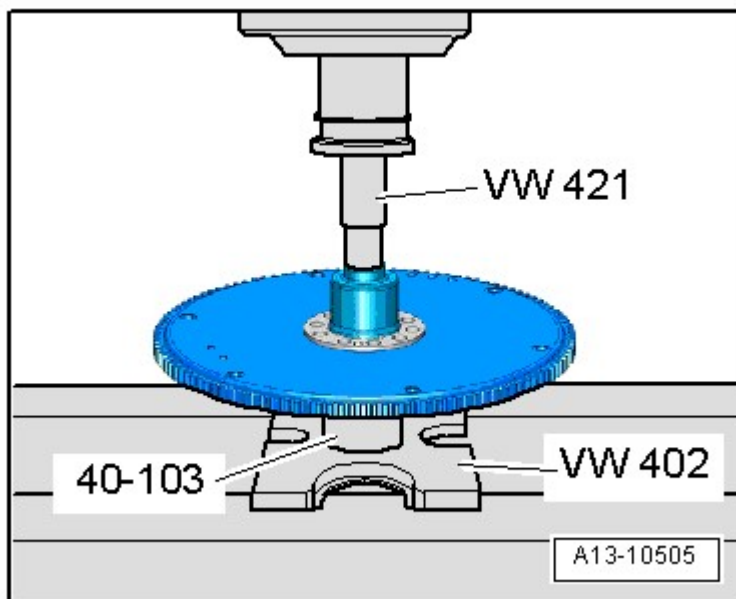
Identifying Special Tools -- Drive Plate Needle Bearing Removal
